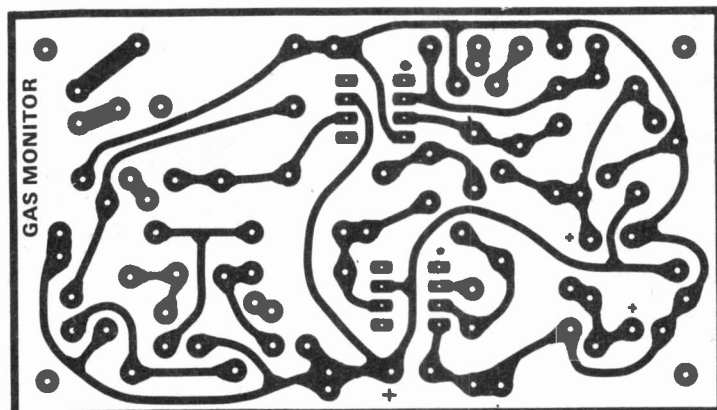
PCB pattern foil side shown full size (52 x 92 mm).
